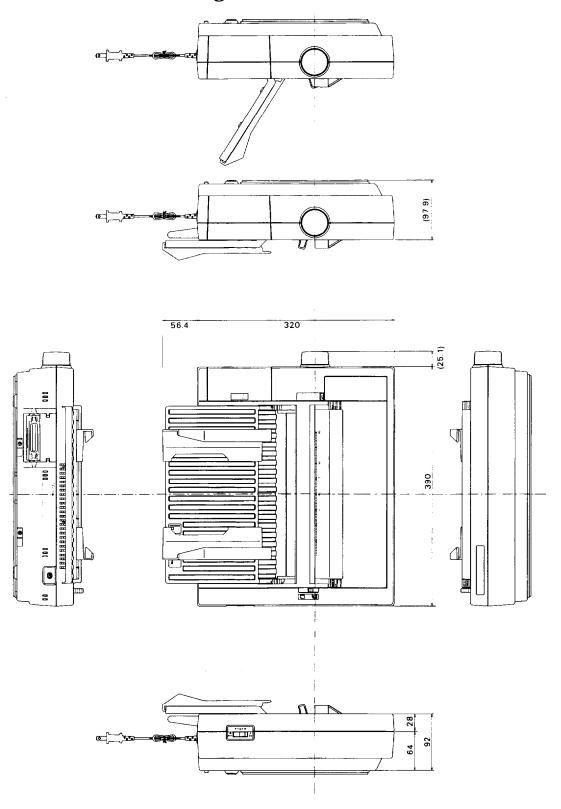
LQ-200/AP3000 Case Outline Drawing
